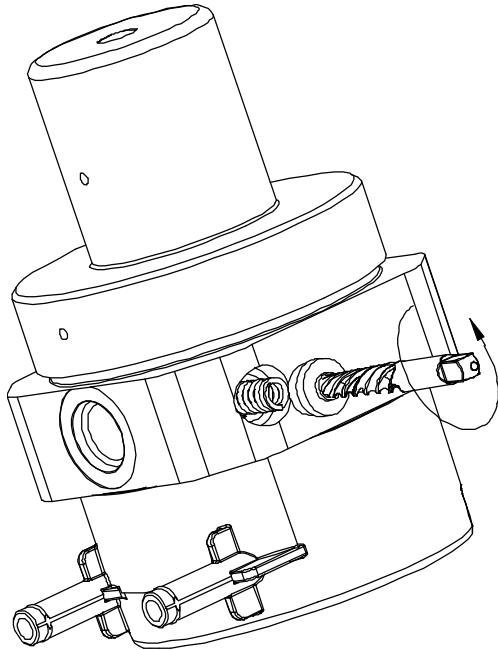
Removal of aluminum PRD retainer screw with a screw extractor.
